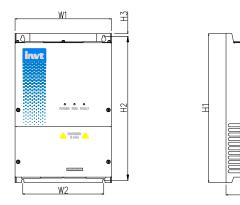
Wall installation diagram for 220V 7.5-18.5kW/380V 15-37kW
